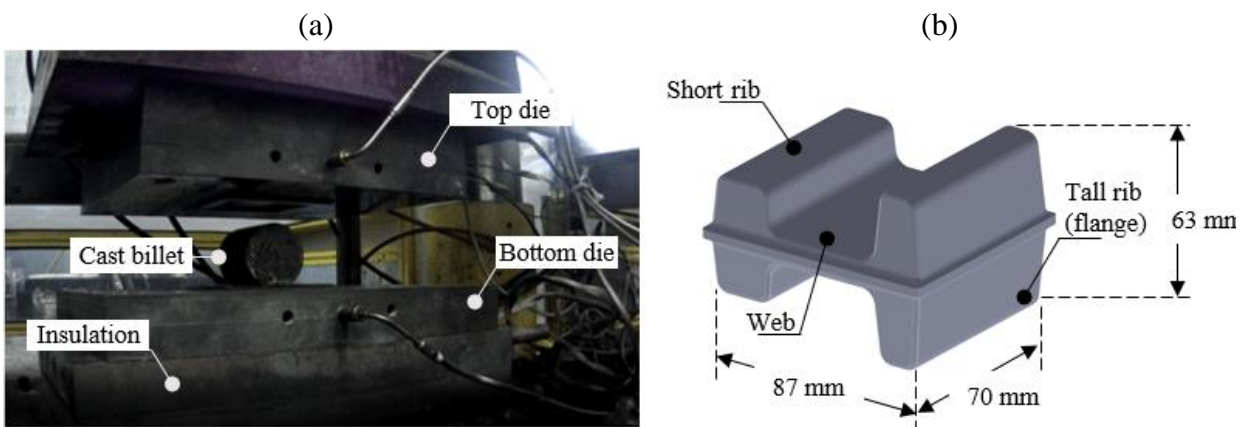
(a) I-beam forging tool used in closed-die forging experiments (courtesy of CanmetMATERIALS); (b) the I-beam geometry
